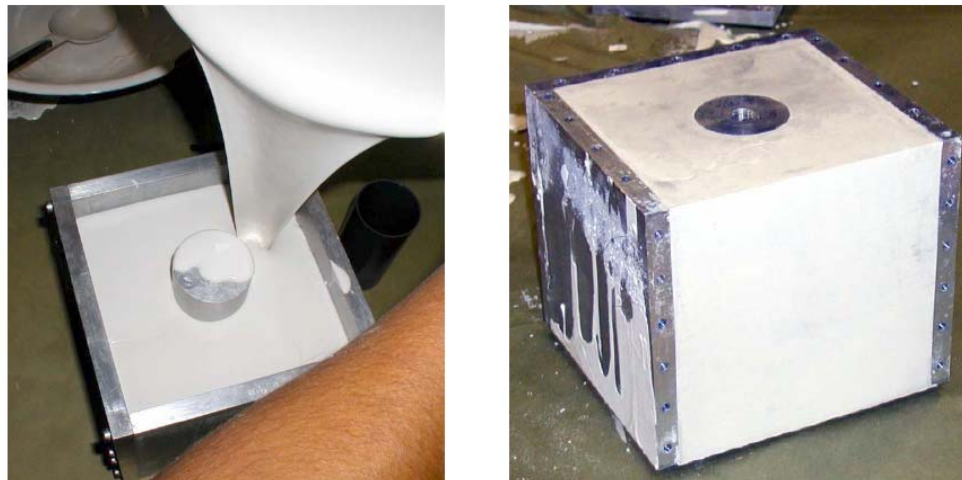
Hydro-StoneTB® Pour into Mold and Mold Partially Removed
